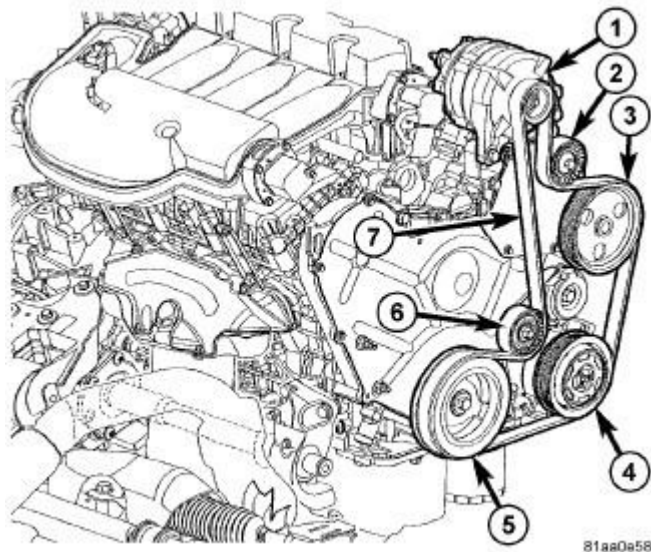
Identifying Accessory Drive Belt & Pulleys
